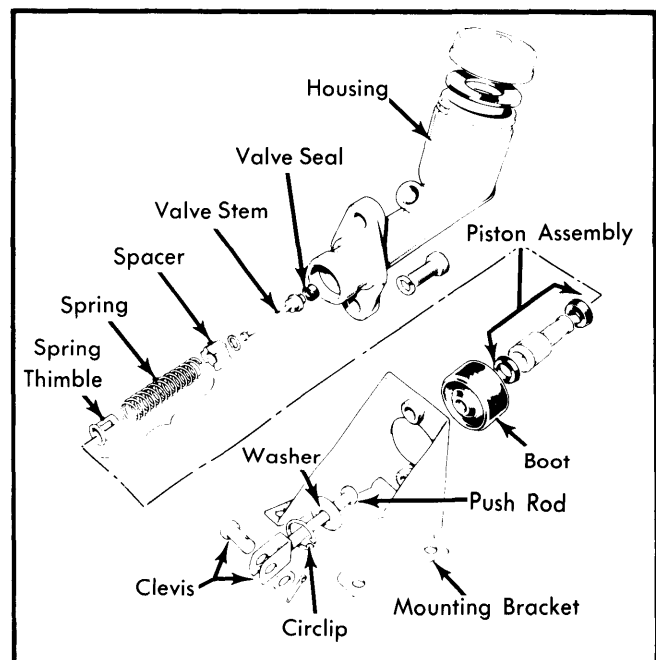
Exploded View of Spitfire Clutch Master Cylinder — Note How Master Cylinder is Mounted
